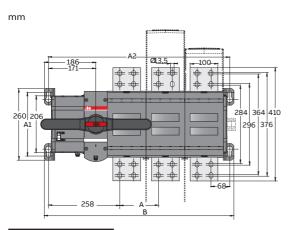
Motorized switch-disconnecotrs. drilling hole distances / screw mounting [mm/in]
